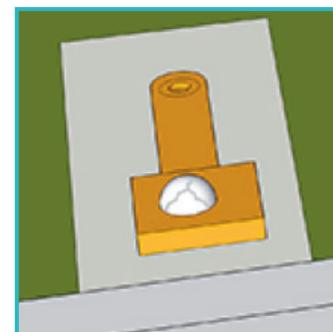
Solder joint on layer of gold which is too thick can lead to solder embrittlement
